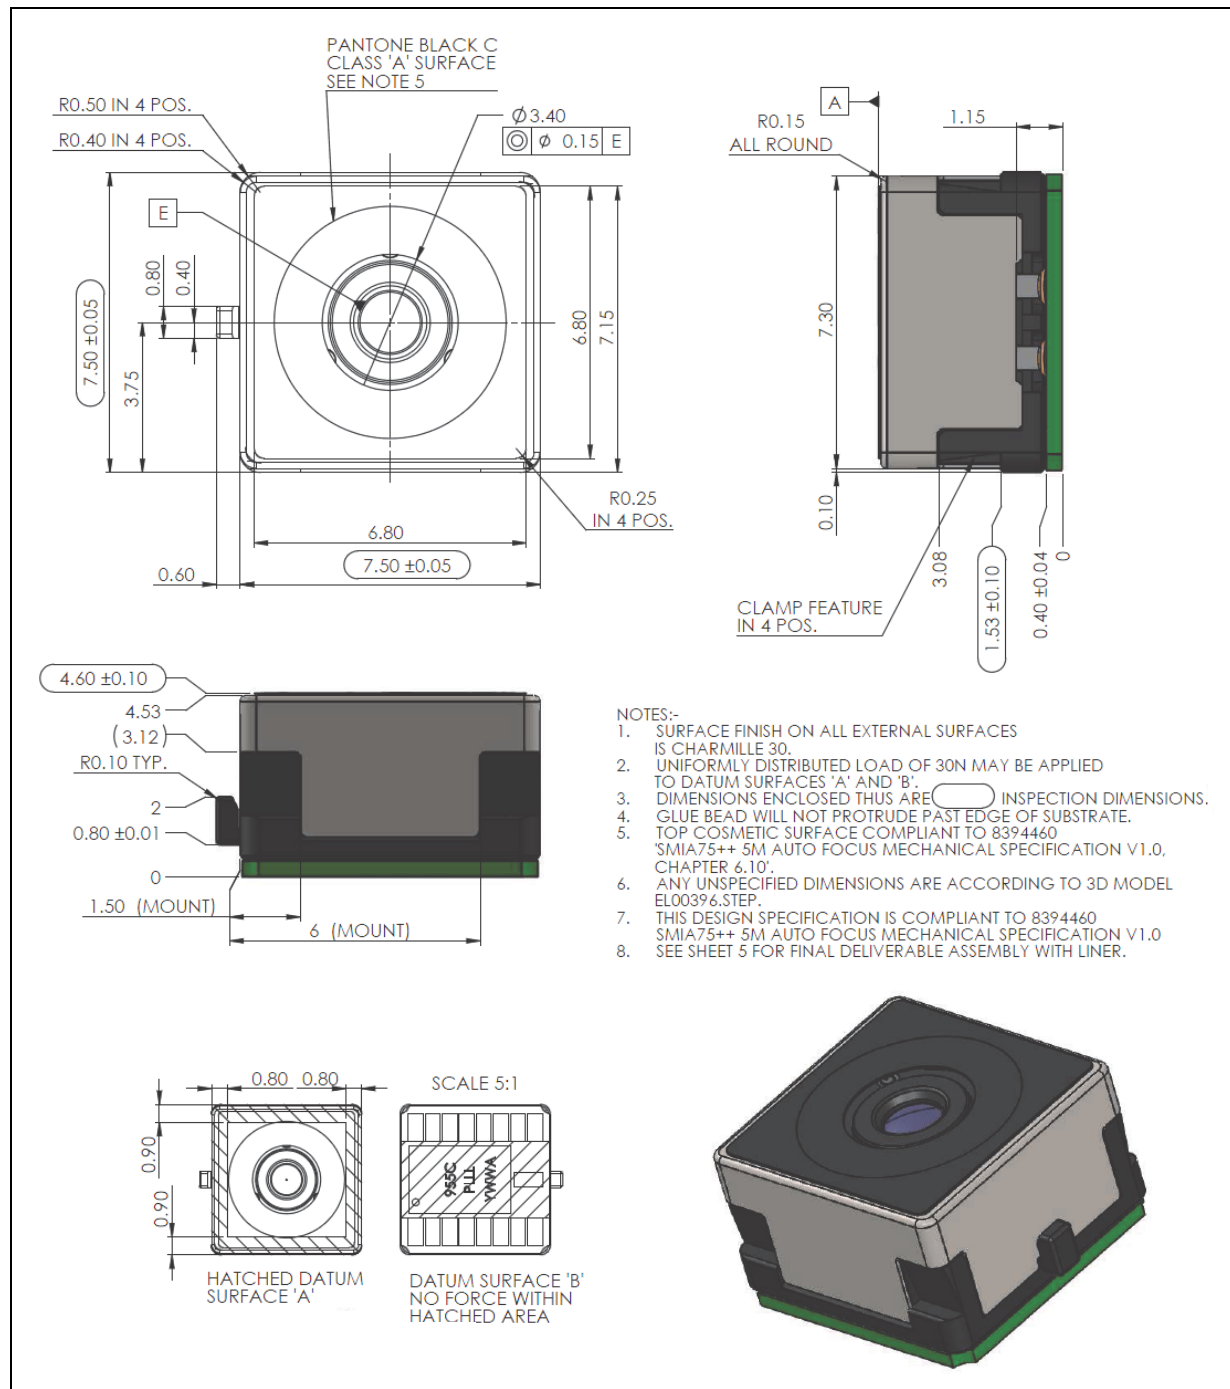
VB6955CM outline drawing in mm - sheet 2 of 6
